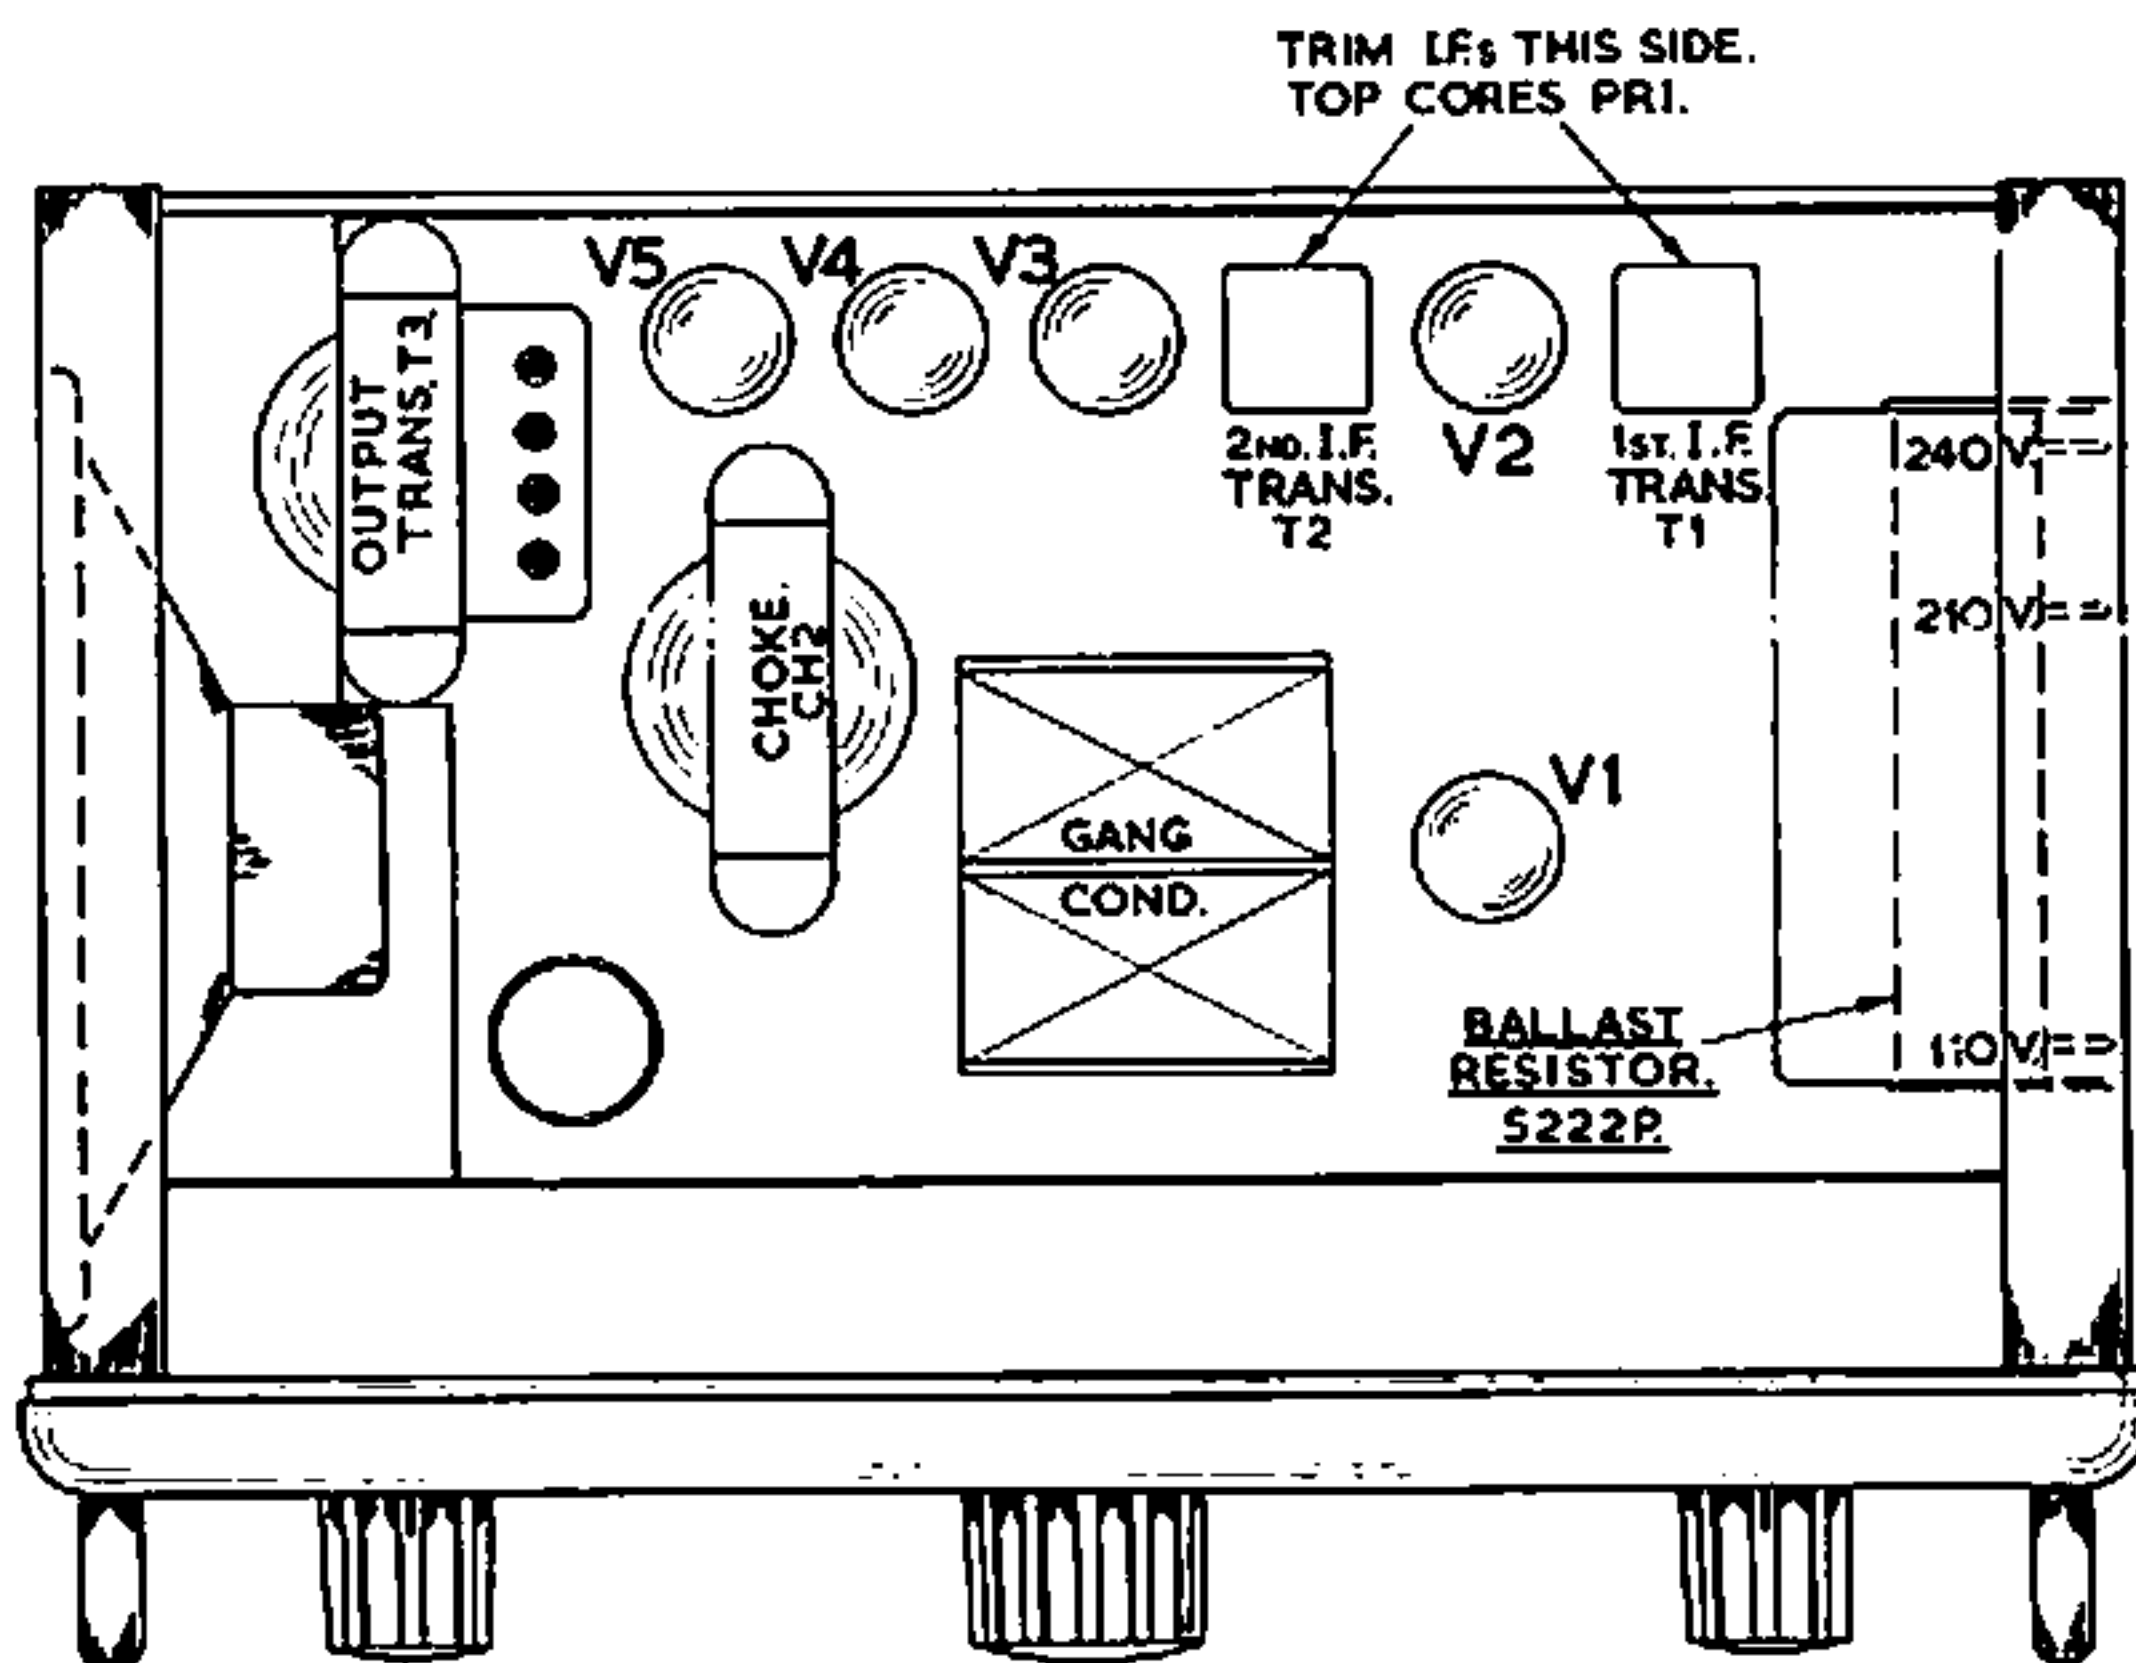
Plan view of the "870A" receiver showing location of valves and major components.
